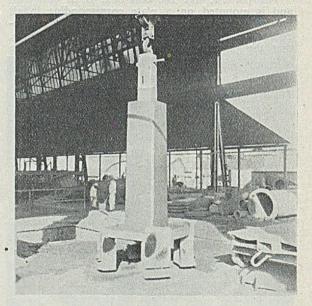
Typical Ingot-mould Core ready for Closing. After Casting, 9 to 10 hrs. is Allowed to Elapse before Stripping. The Boxes are laid Flat and Opened along Two Opposite Corners on the Joint; the Casting, complete with Sand, is Lifted out as a Unit.
